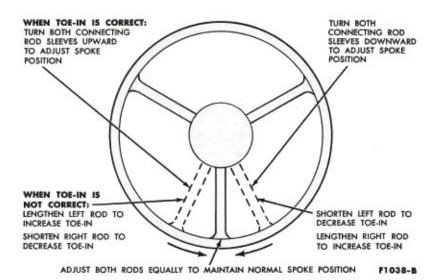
Toe-in and Steering Wheel Spoke Alignment Adjustments
